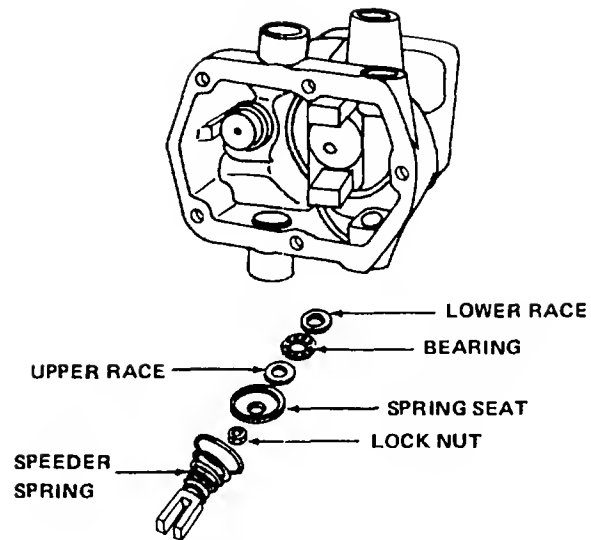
Governor Thrust Bearing and Speeder Spring Parts
